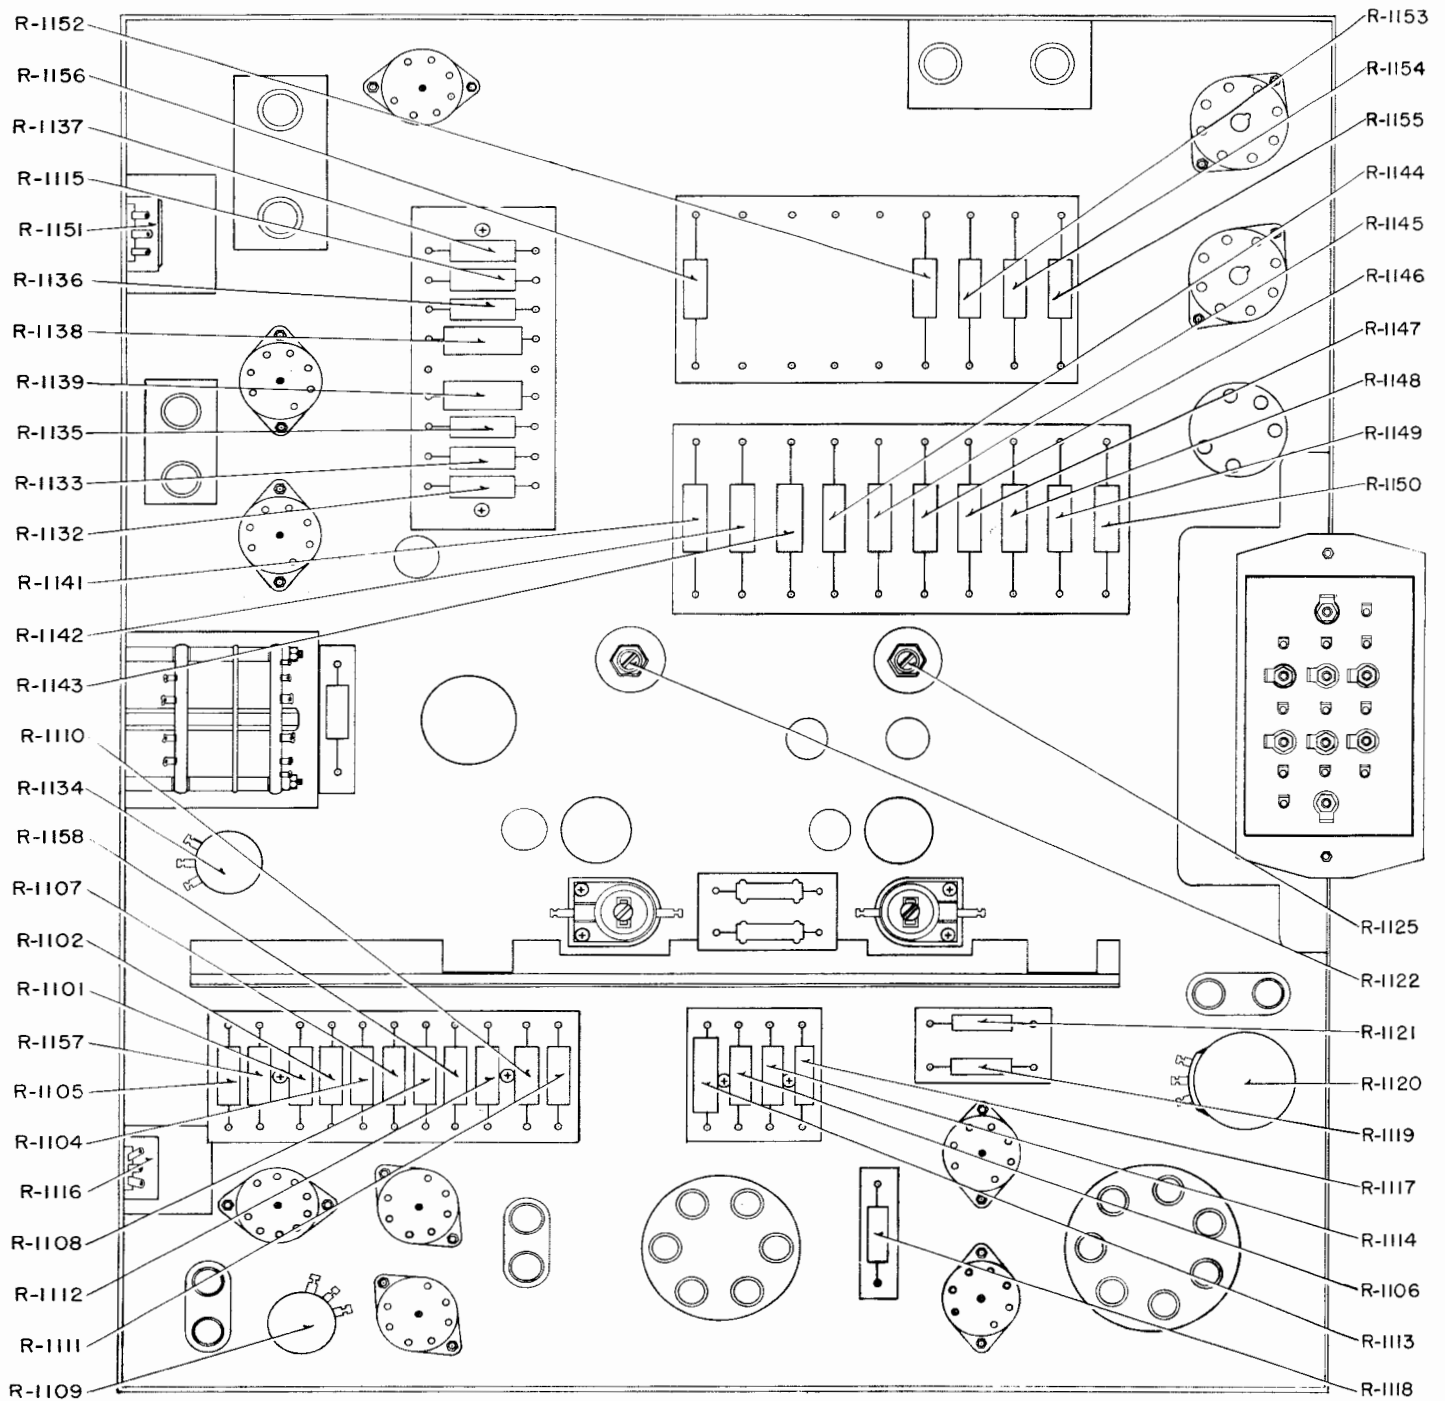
Resistor Locations, Bottom of Chassis, Keyer KY-62/FRR-24
